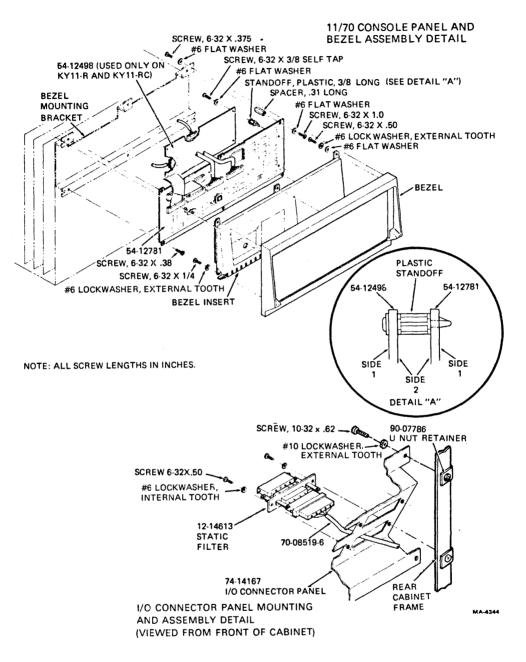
KY11-R/KY11-RC Mechanical Assembly
